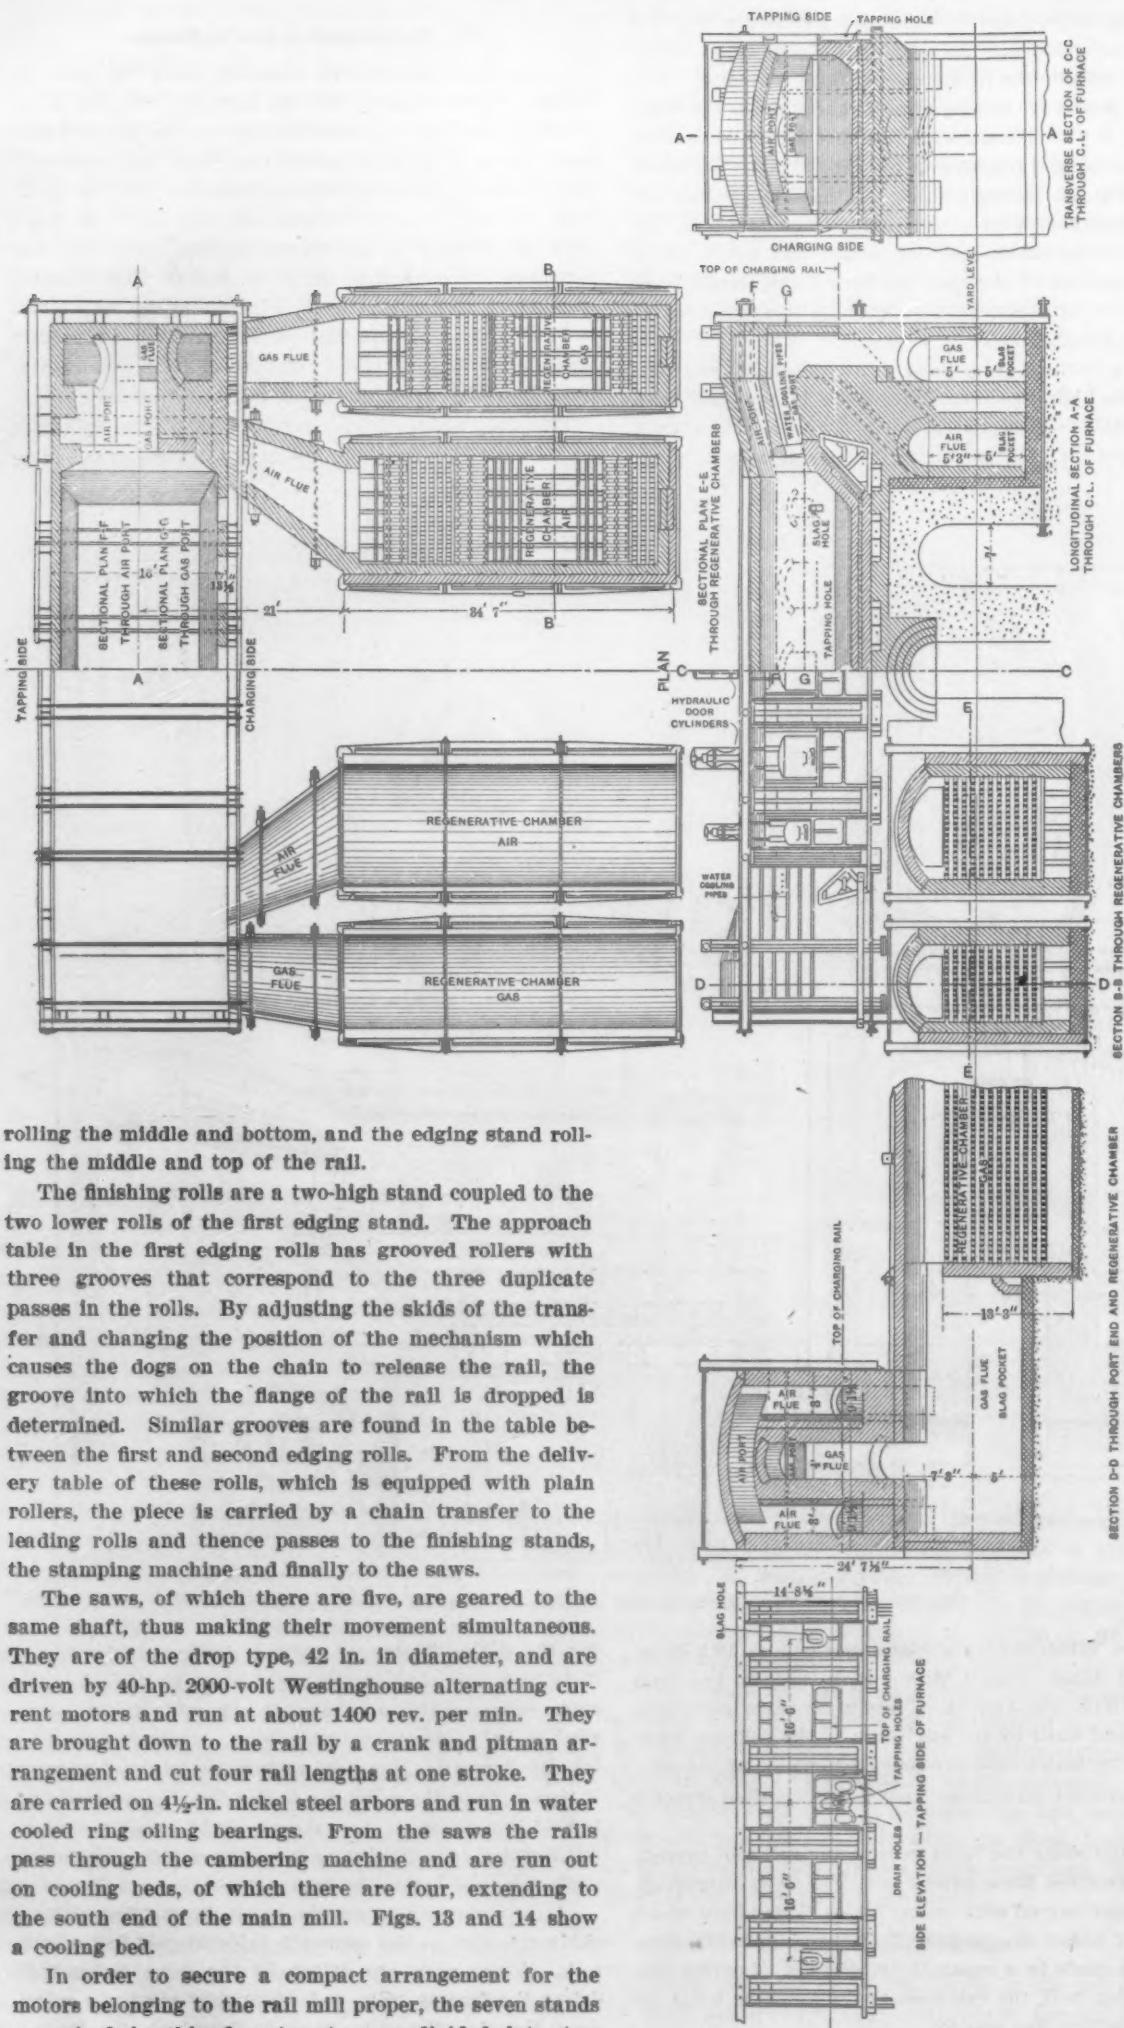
Plan, Elevations and Horizontal and Vertical Sections of an Open Hearth Furnace.
